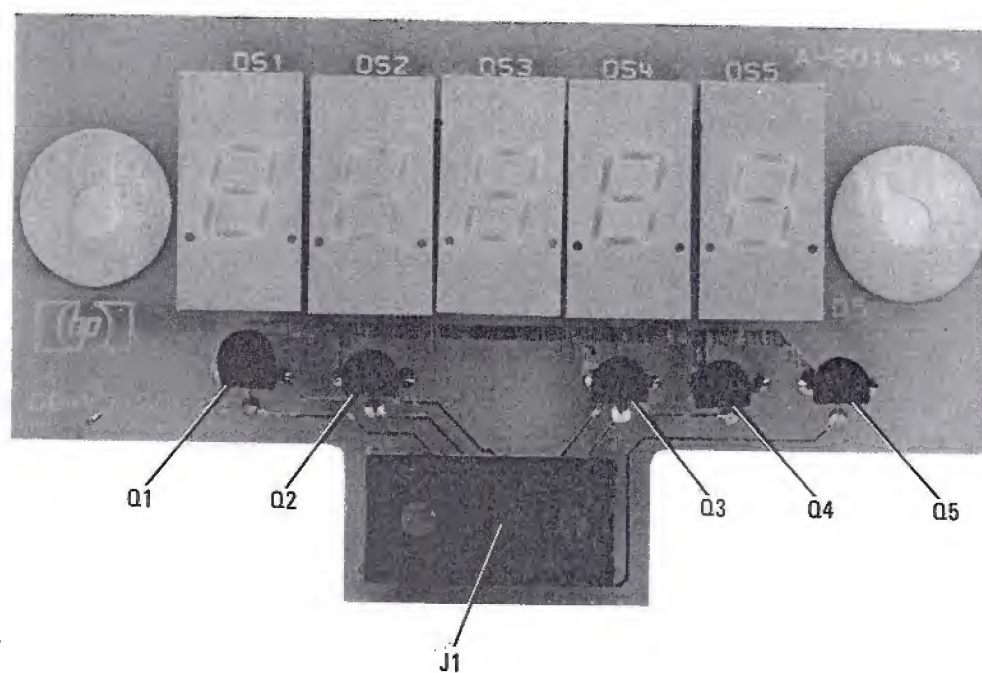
A7A1 DPM Display Board Assembly Parts Locations
